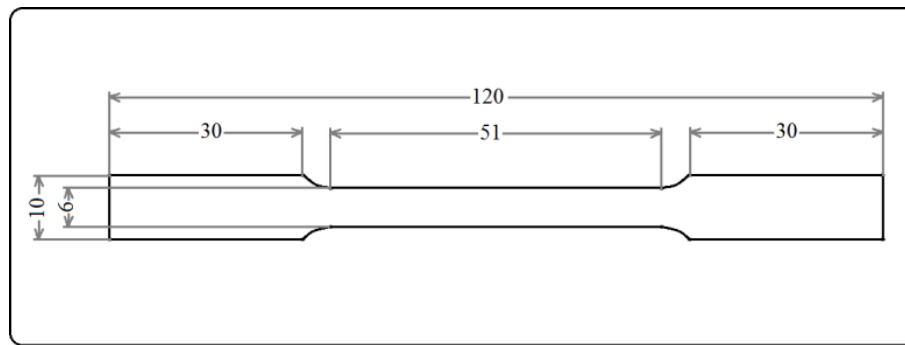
A drawing for the sub-size sheet tensile test specimen as per ASTM standard E8M.
